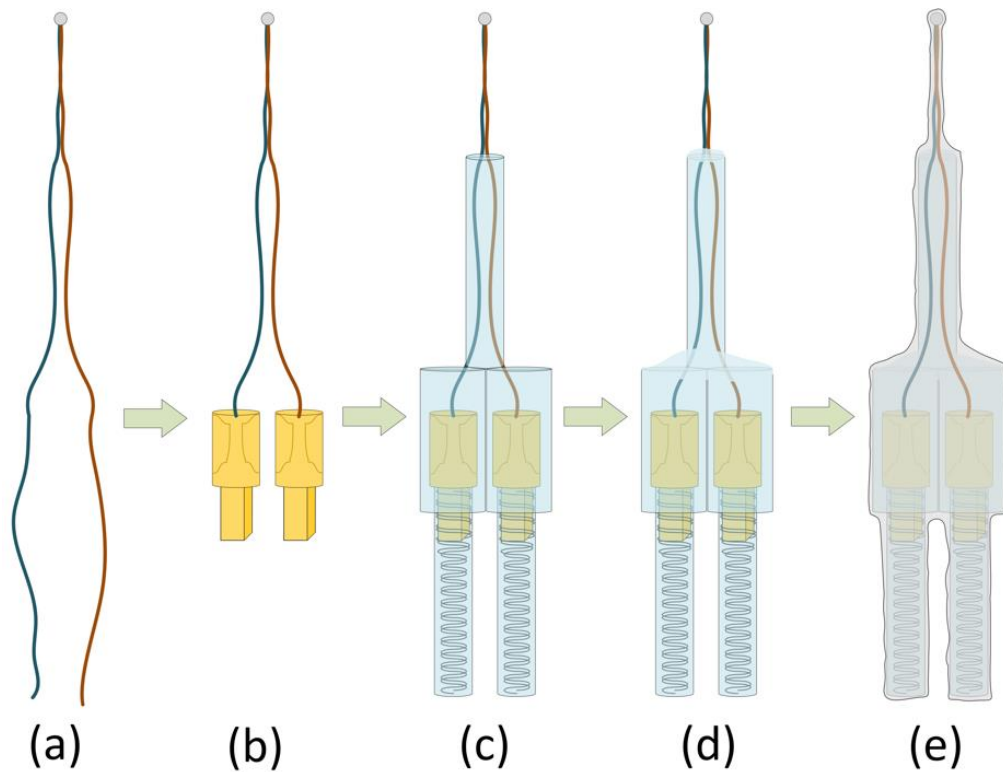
Chronic thermocouple transducer fabrication. We first trim the 36 AWG wires of a type k thermocouple shown in (a) and then attach pins shown in (b) via a crimping tool. We wire-wrap helical wires onto each pin, and insulate the pins, wires, and body of the thermocouple with silicone tubing shown in (c). To seal the silicone tubing shown in (d), we use a silicone adhesive. Finally, we apply a 5 μm thick Parylene coating as shown in (e) to insulate the non-biocompatible tip of the thermocouple transducer.
